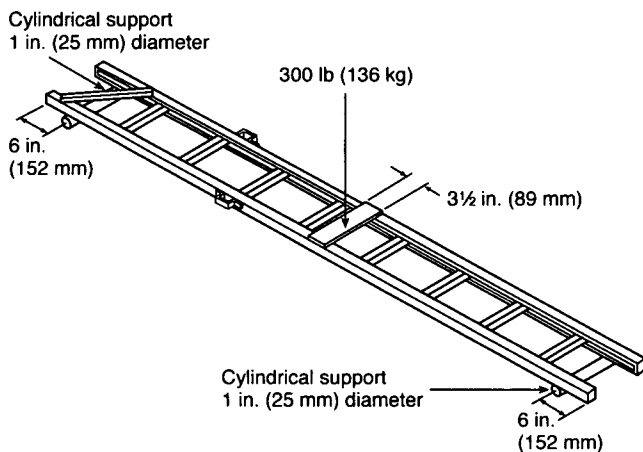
Design verification folding ladder horizontal bending test.
